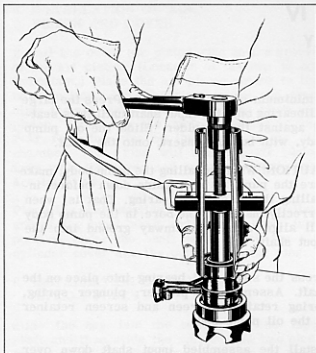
REMOVING INPUT SHAFT OUTER BEARING
